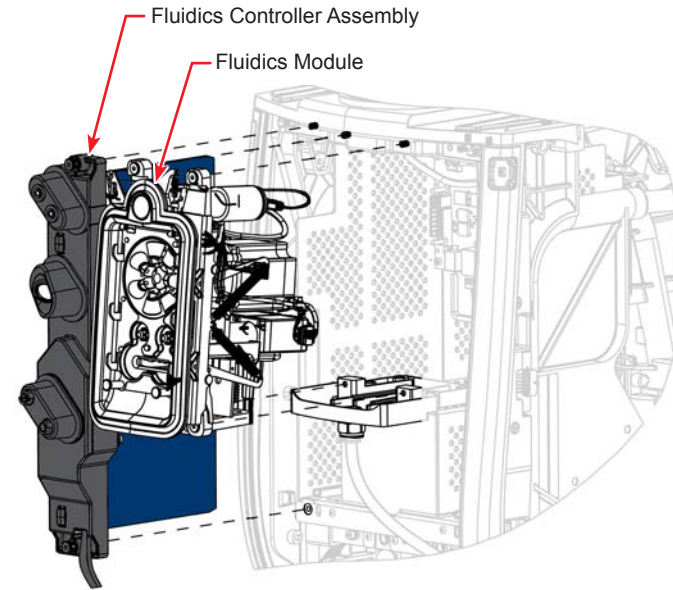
Fluidics Module and Fluidics PCB Assembly Removal
